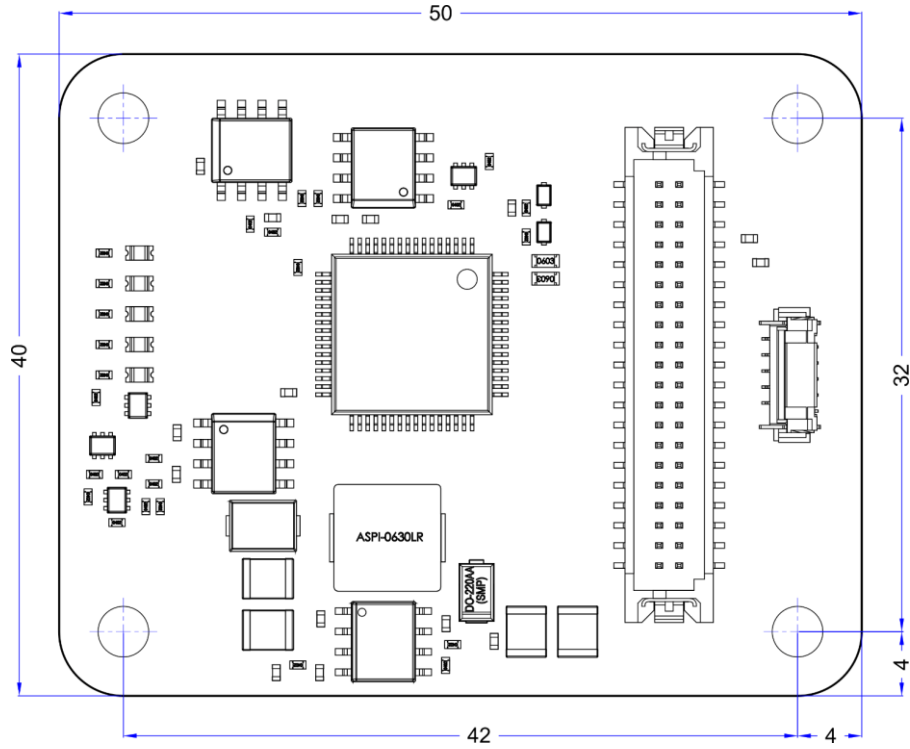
Toradex DSI to LVDS Adapter Dimensions (mm) – top side, top view
